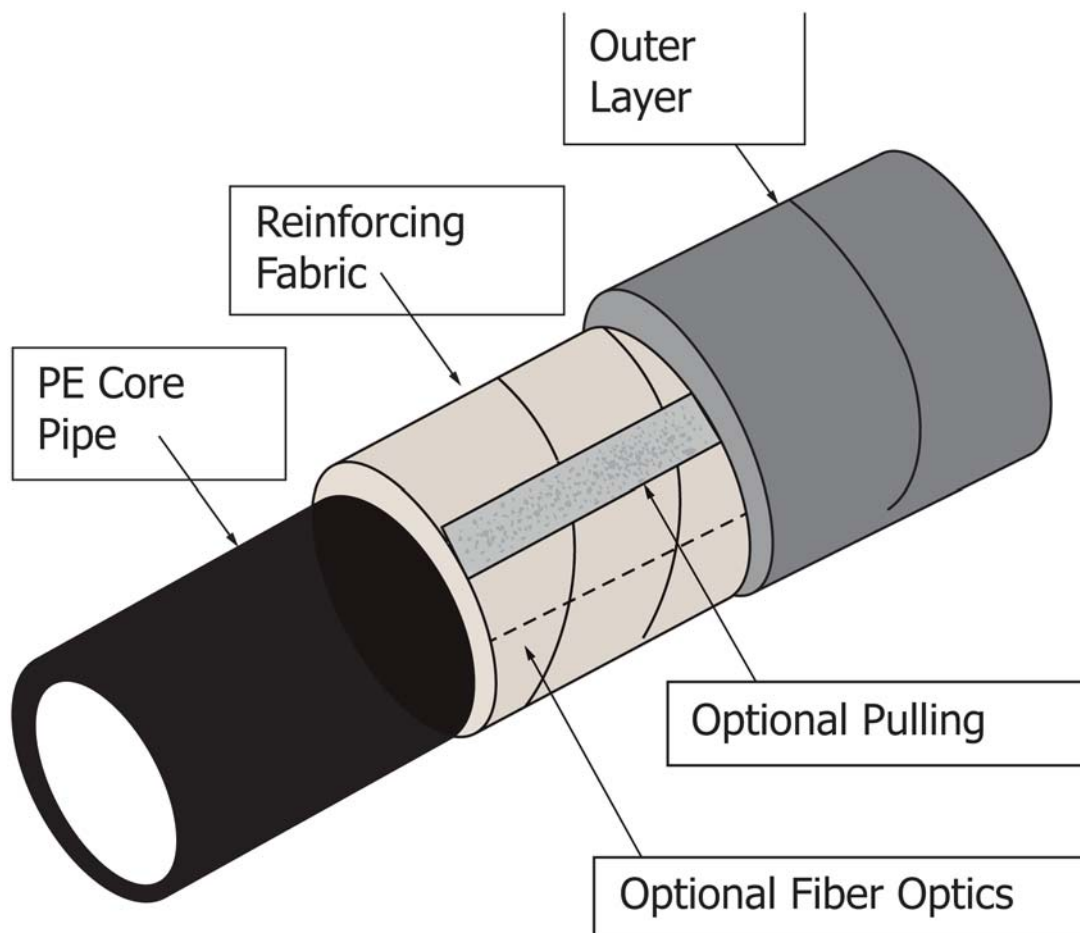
Typical Construction of Reinforced Polyethylene Composite Pipe
